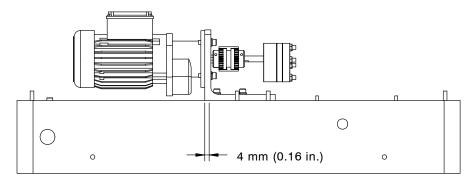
Moving the motor assembly back 4 mm (0.16 in.)
